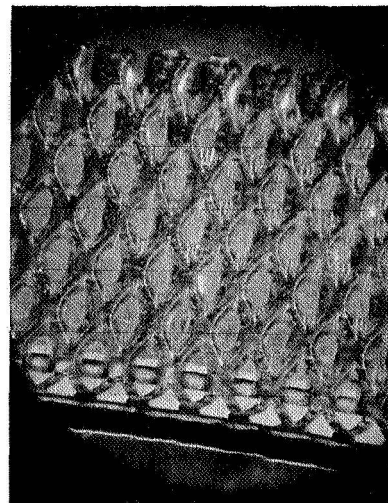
Silver Mesh Solder Joint Produced by Infrared Soldering Process
